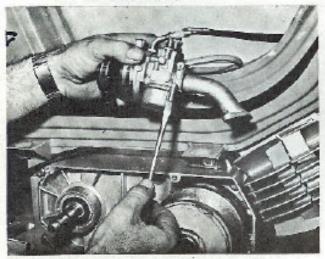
Remove the carburetor from the engine. This allows work on the carburetor should this be required.
